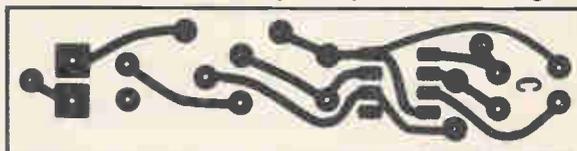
This is a full-size foil pattern of the PC board for the Simulated Laser.
